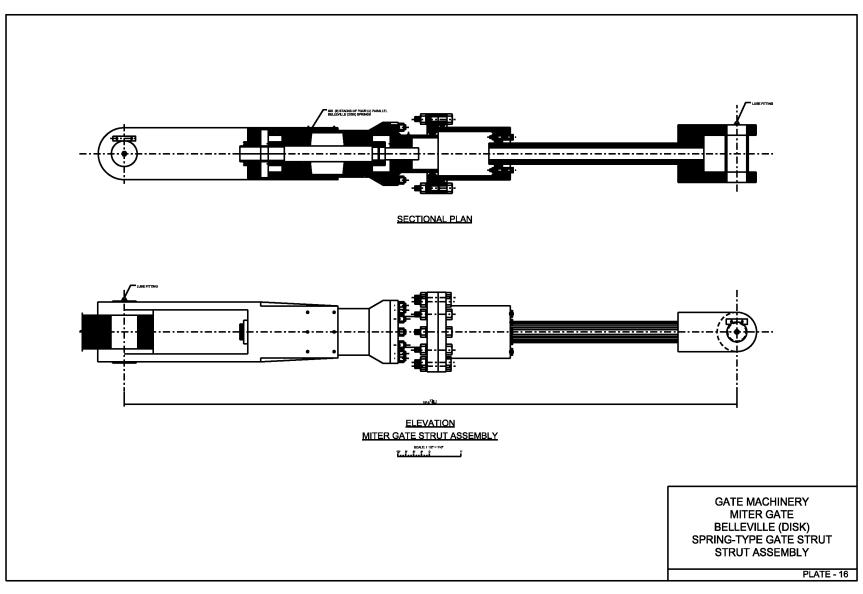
Plate 16: Gate machinery, miter gate, Belleville (disk) spring-type gate strut, strut assembly
